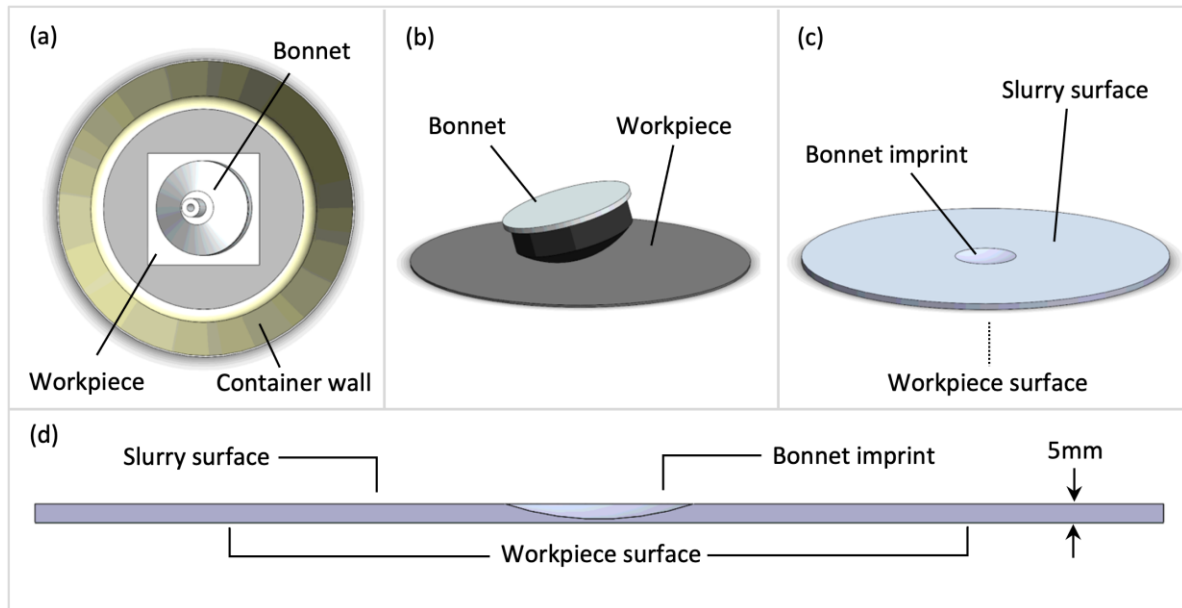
(a) Bird's-eye view of full RBF setup. (b) Isometric view of simplified bonnet on workpiece surface with WD. (c) Isometric view of the fluid domain with thickness of 5mm. (d) Cross-section view of the fluid domain.
